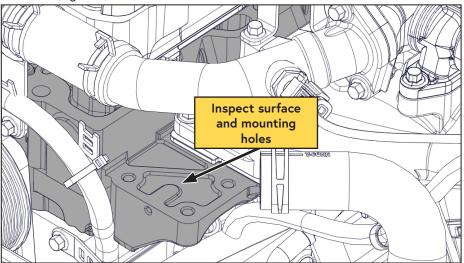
Compressor bracket mounting surface (Some radiator hoses removed for clarity)
